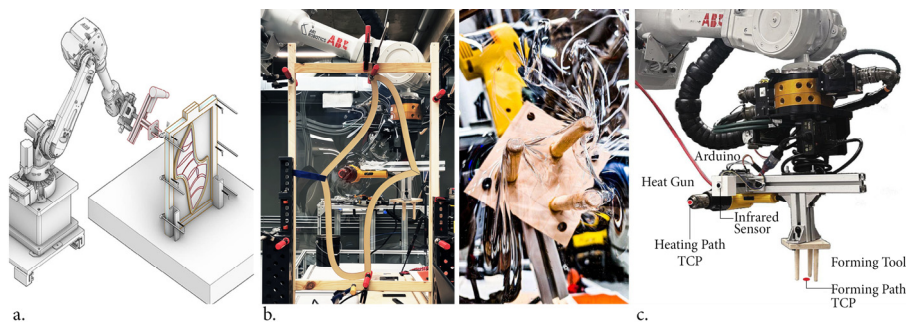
(a) Experimental setup with ABB robotic arm (b) Robotics heating and forming process photos (c) dual-head customized heating and forming end-effector.
